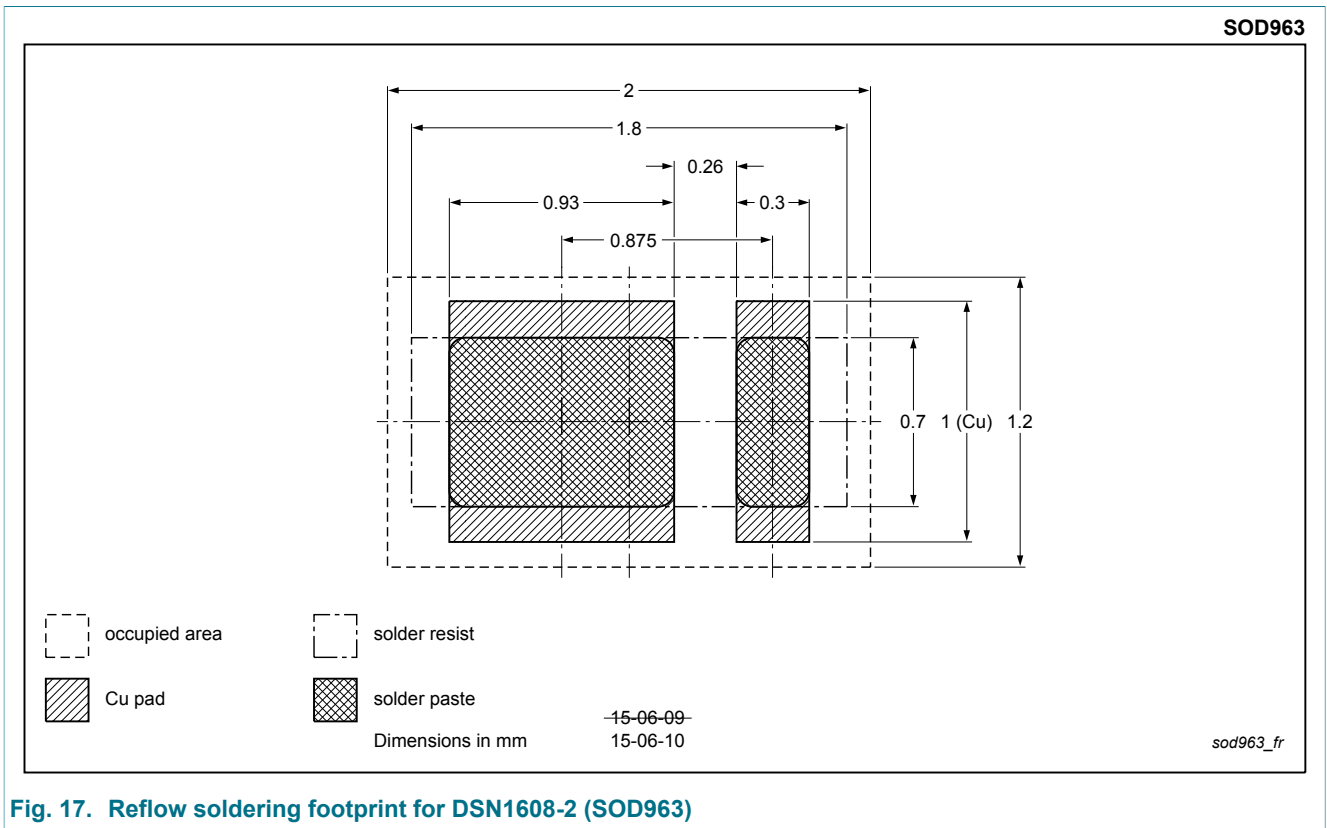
Reflow soldering footprint for DSN1608-2 (SOD963)
